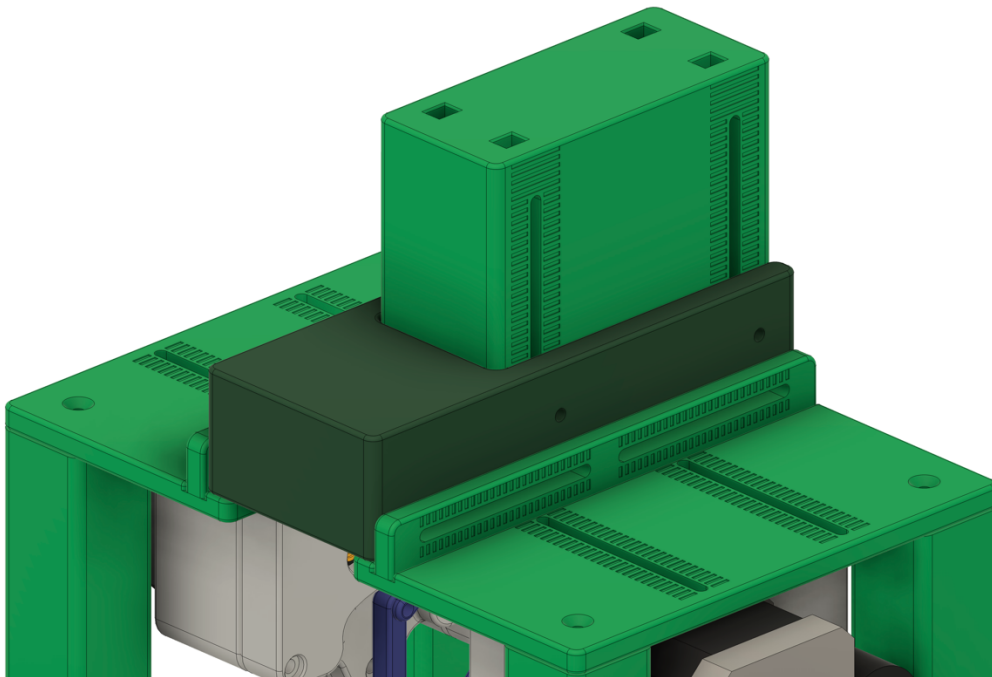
View of all adjustment sliders on CAD model of first prototype
